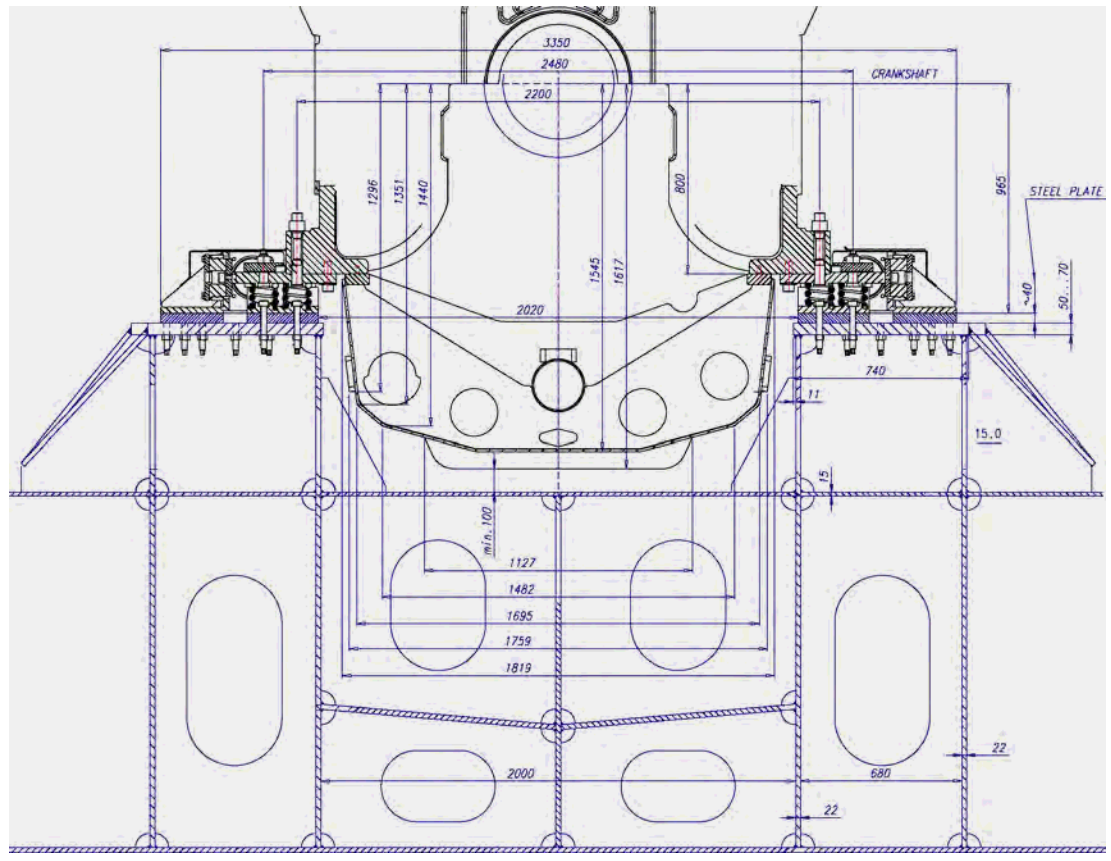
Seating and fastening, resiliently mounted V-engine (DAAE057412)
